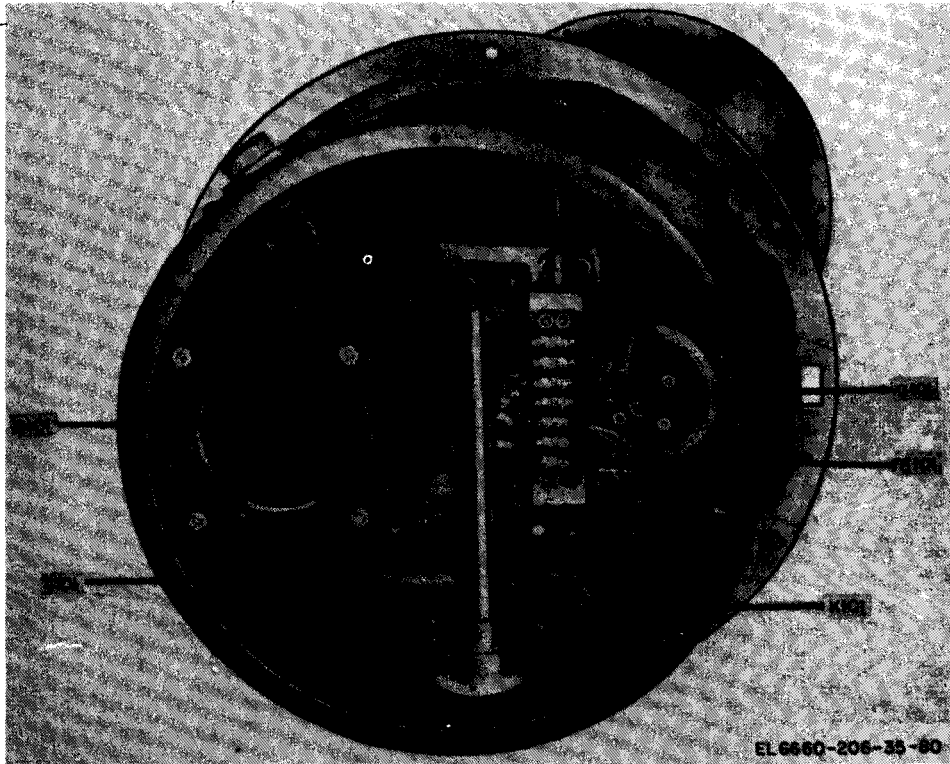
Antenna scanner assembly (AN/GMD-1A), cover removed.
